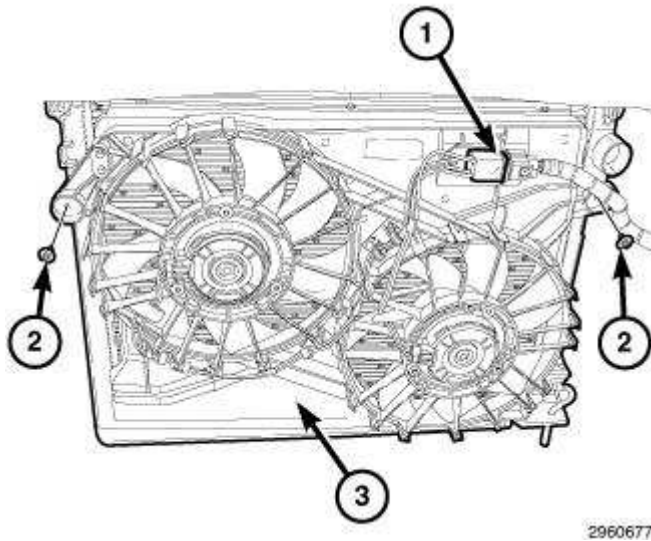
Cooling Fan Electrical Connector, Cooling Fan Mounting Bolts & Radiator Cooling Fan Assembly
